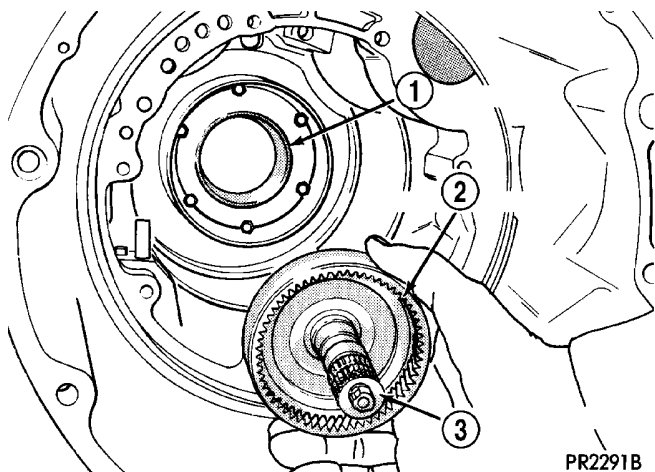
Remove Output Shaft and Rear Annulus Gear Assembly
